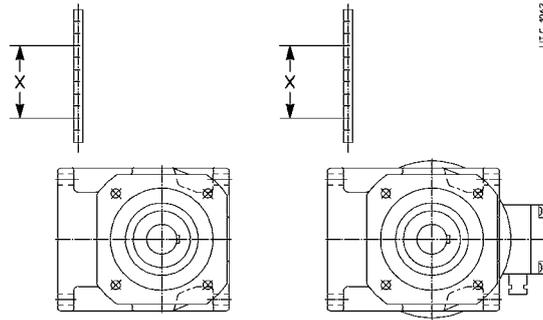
Position the gear reducer or gearmotor, mounting position B6 for the measurement of oil level (quantity).
